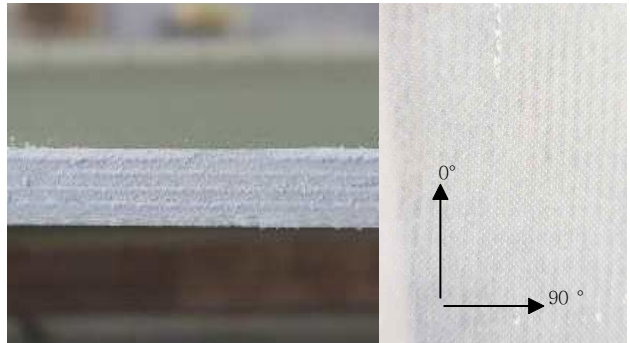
Cross section and plan view of fabricated 5-layer GFRP
